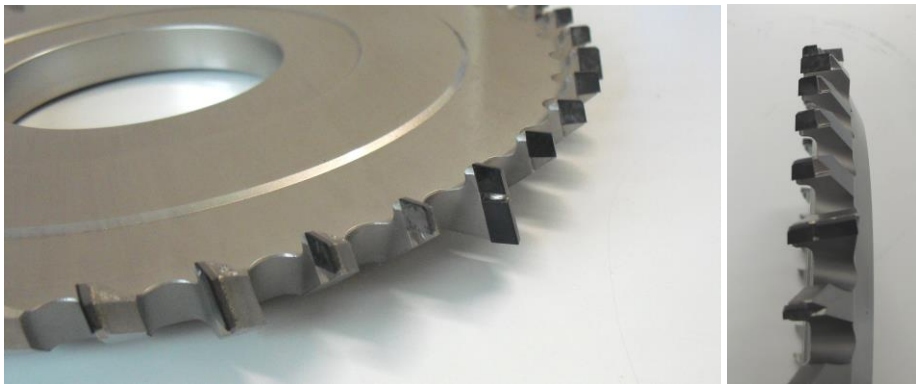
A tool for squaring: diamonded inserts on a steel body (Courtesy Hogger)
